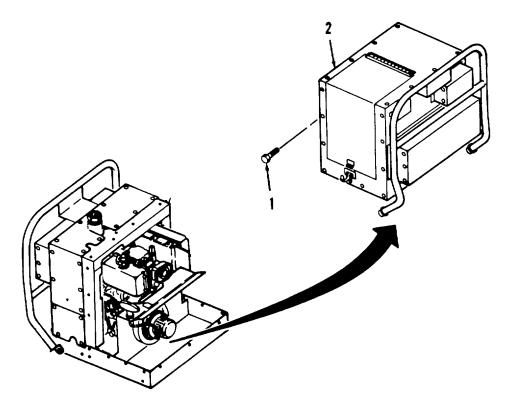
Enclosure Assembly, Inlet Side Removal.
